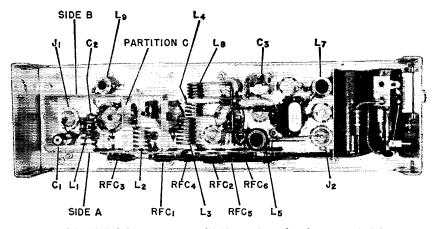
Interior view of the W2LVQ 2-meter converter. Shielding enclosure for r.f. circuits at the left is shown with cover removed. Principal components are indicated where placement is important.
